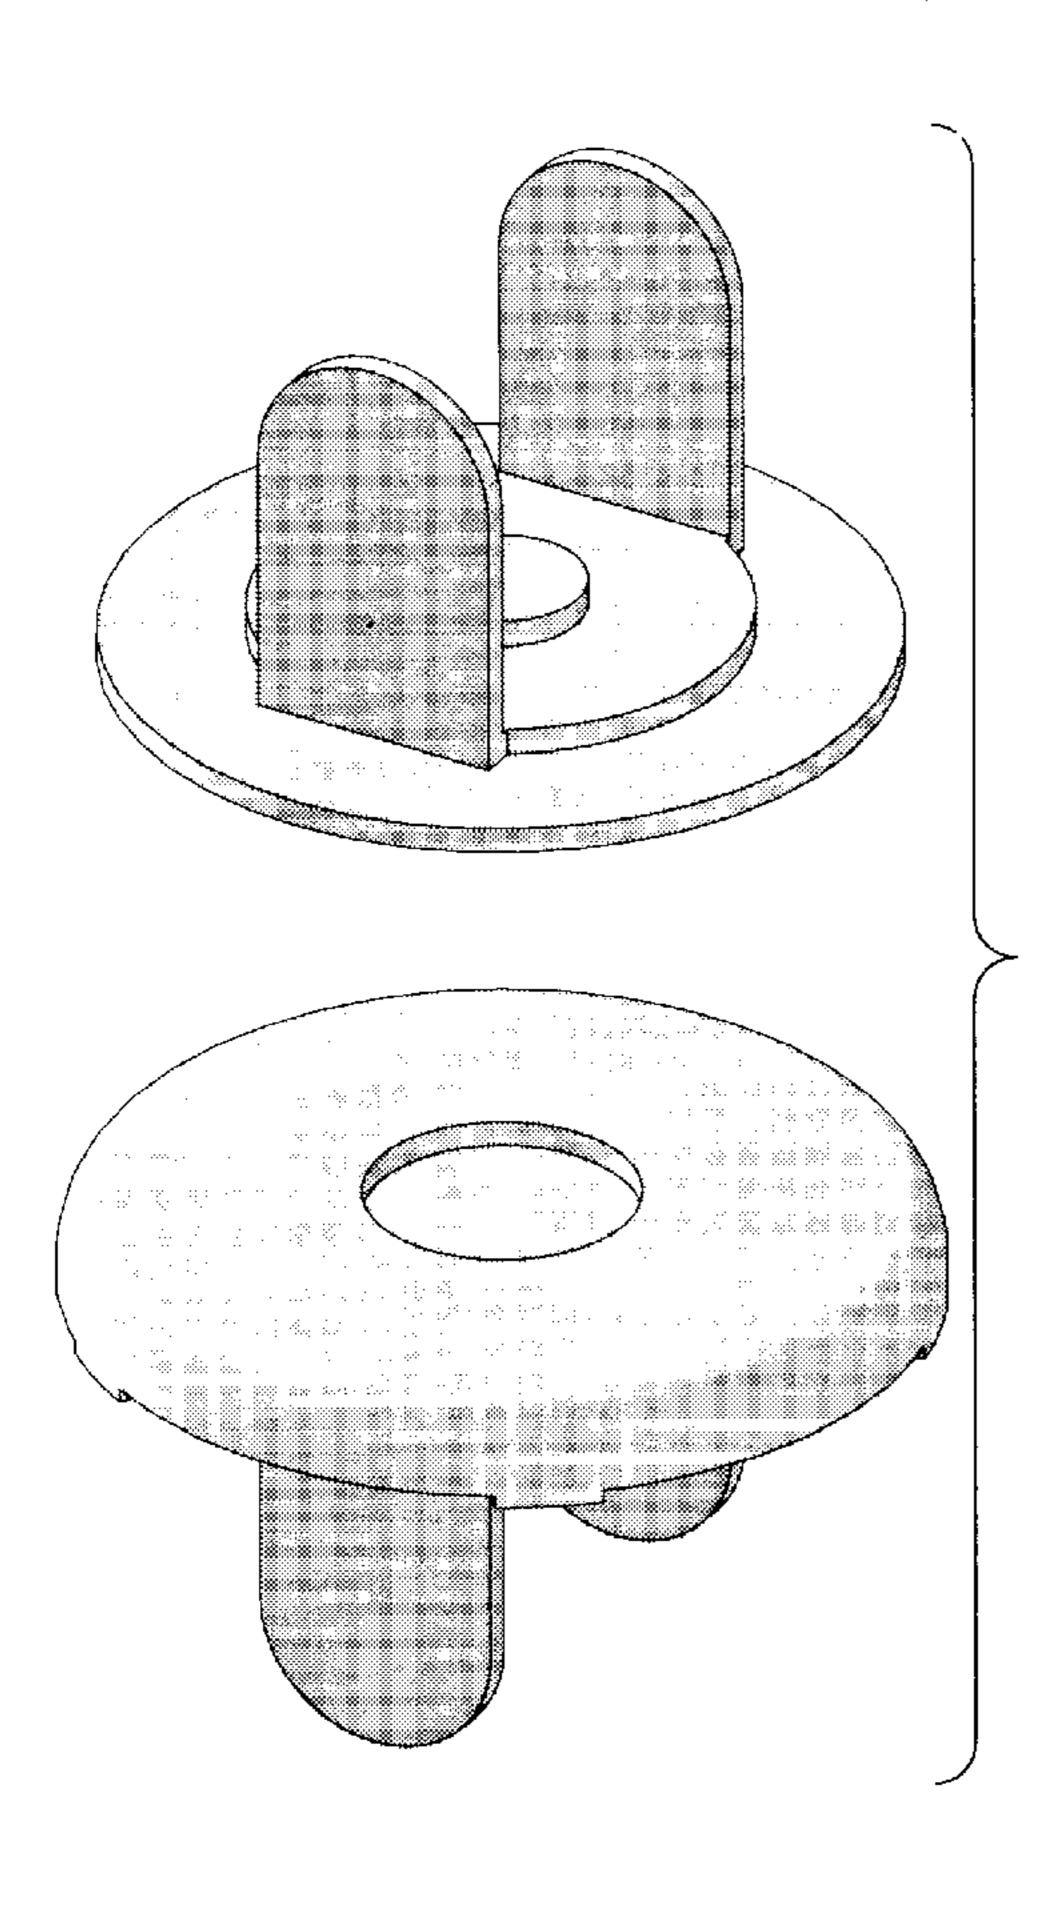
is a perspective top view of the fourth embodiment of the magnetic fastener showing the male and female parts in a closed configuration;
